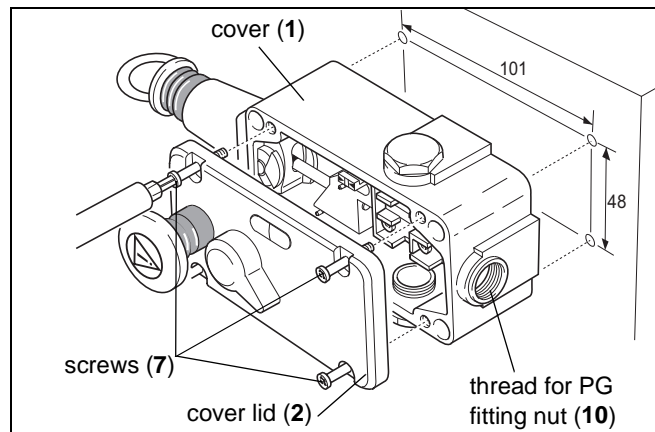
Fastening of the emergency cord switch to the belt conveyor system
